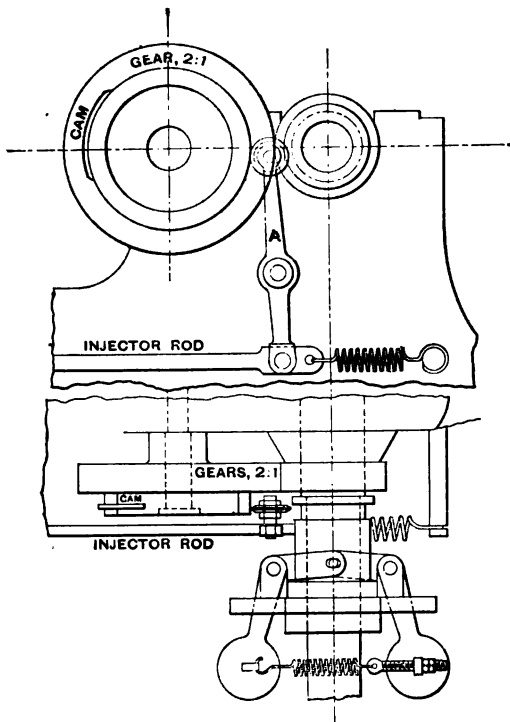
DETAILS OF THE CHARTER ENGINE.
